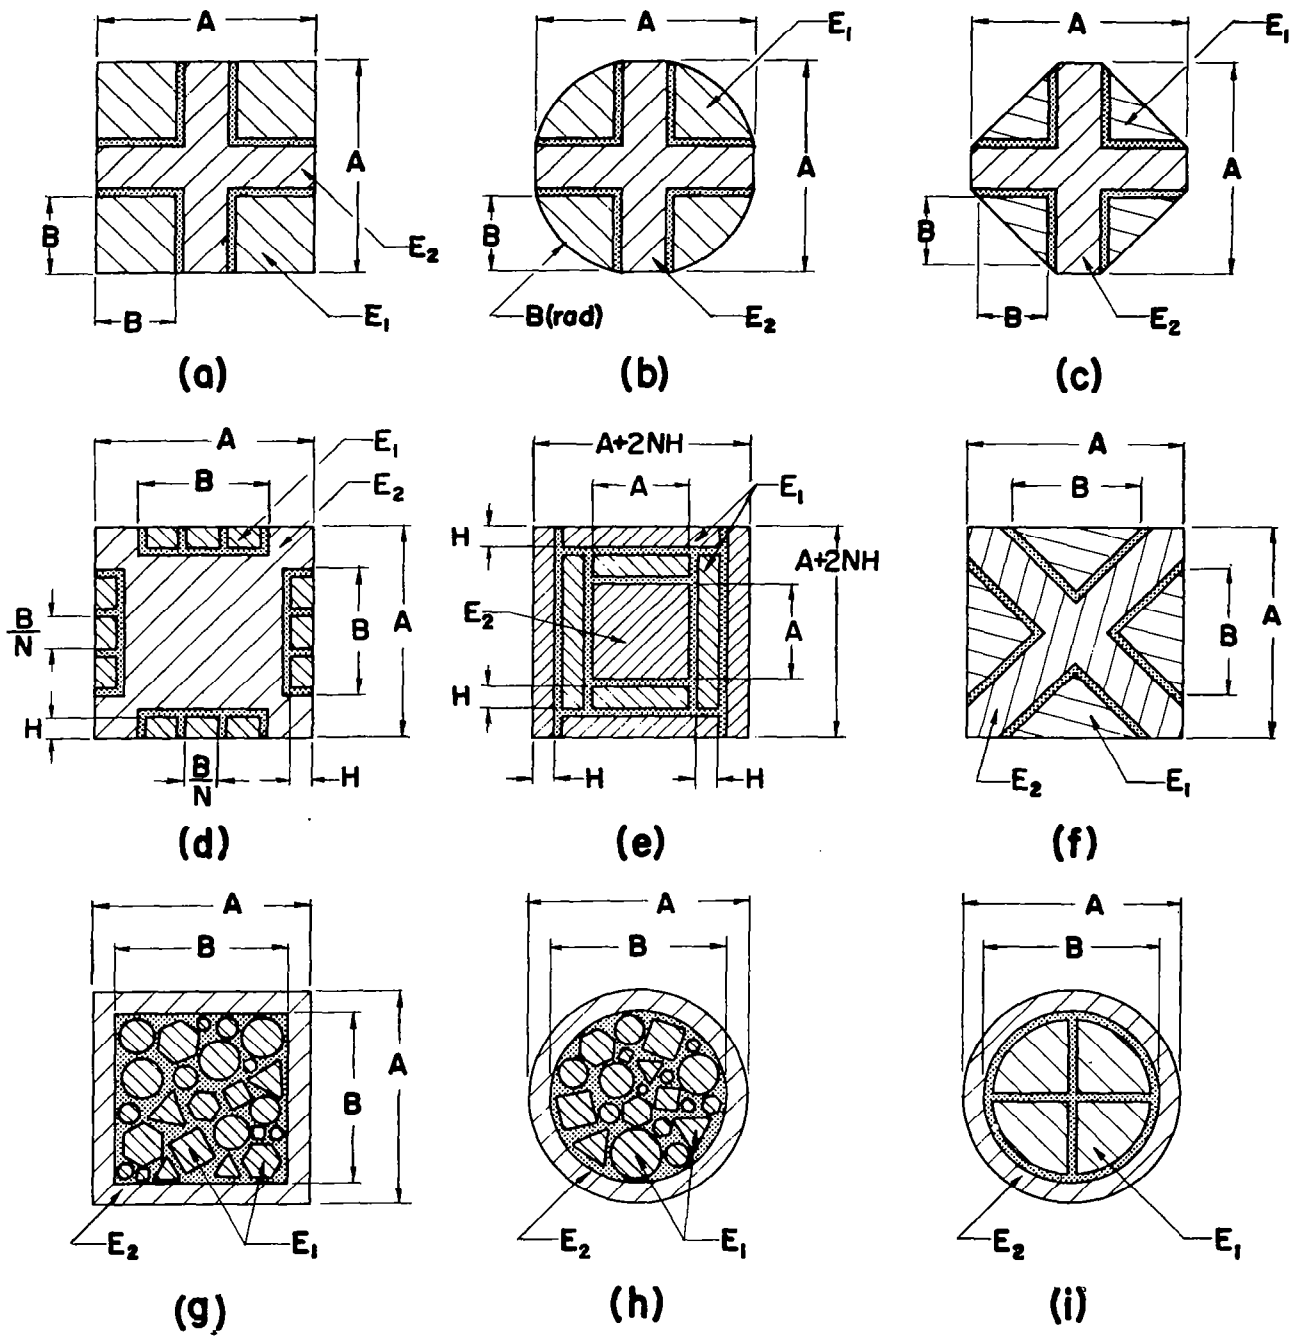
Cross-sections of viscoelastic shear-damped structural bar designs.
